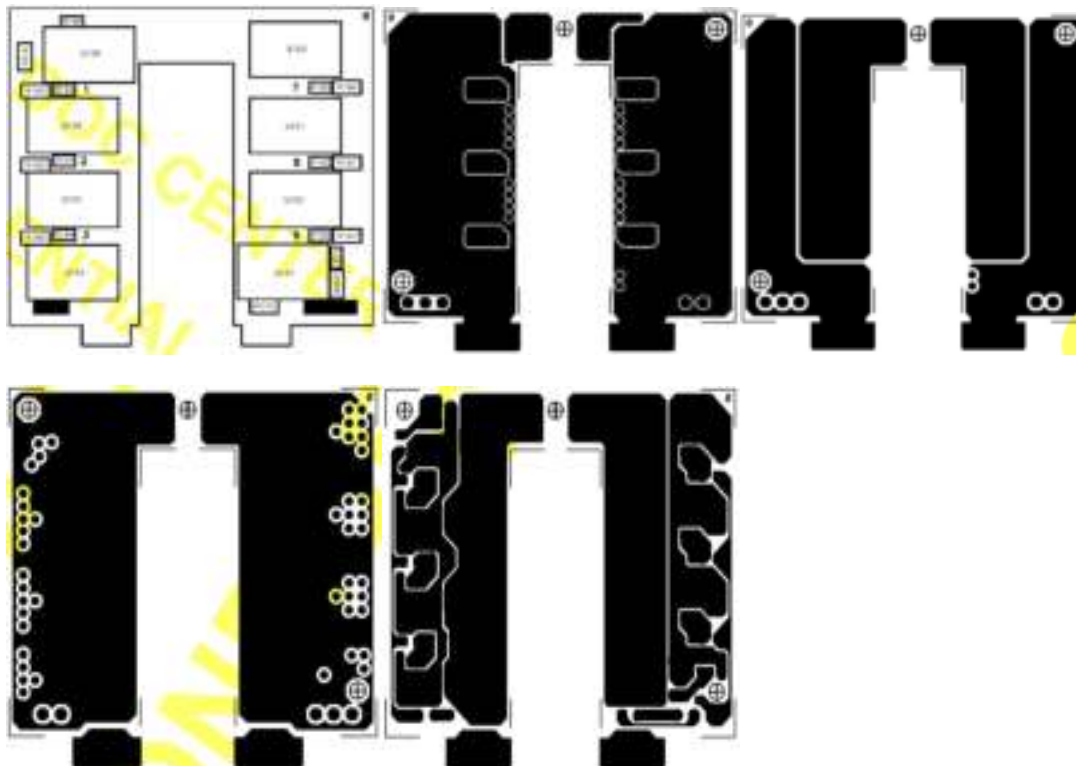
PCB type DC-4971 (GPS-1000DB XX)
